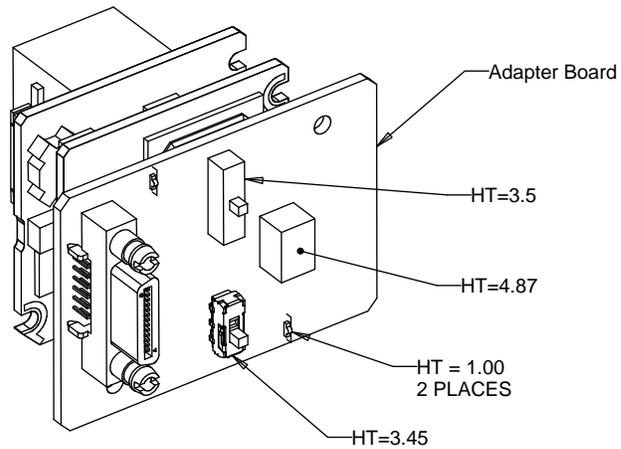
OEM Board Set No GPIO Connector: Adapter Board Detailed Measurements
